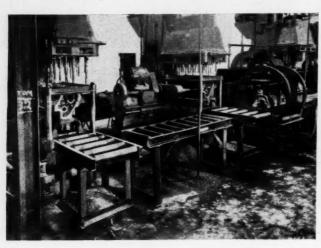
Conveyor section mounted on a ball-bearing turntable. At the right is a "roll-over" device, for turning blocks upside down without injury to the blocks, the conveyor, or the operator.
